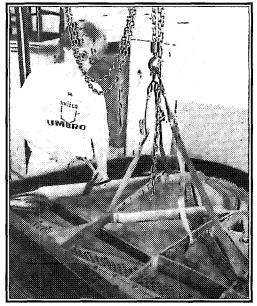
Attaching the nylon cinch straps to the plate struts.
